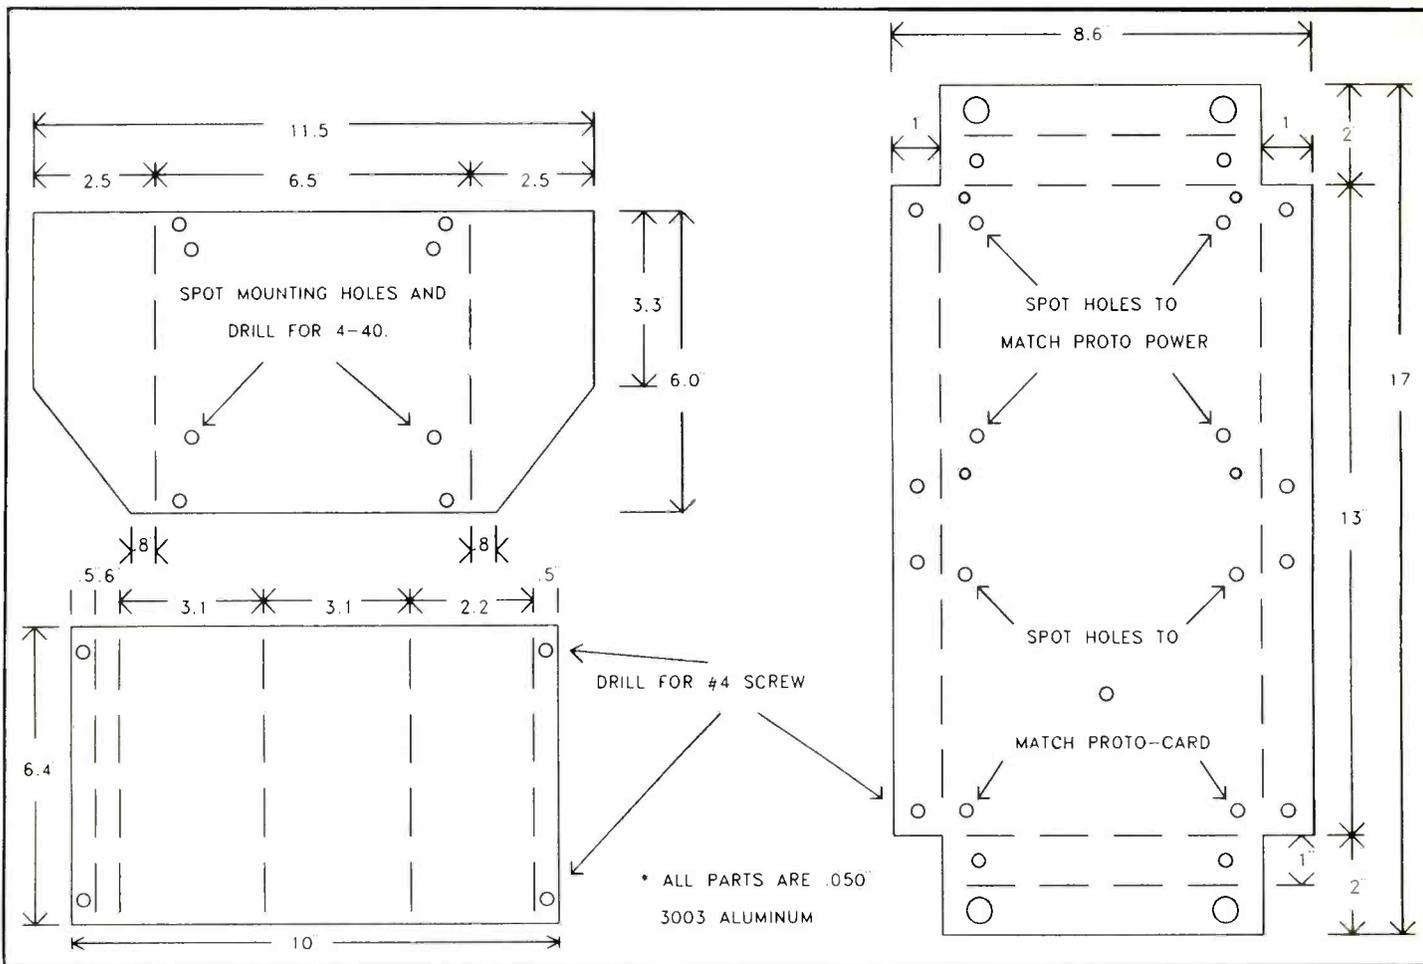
Mechanical details for fabricating the CYANCE Lab's metal components.
